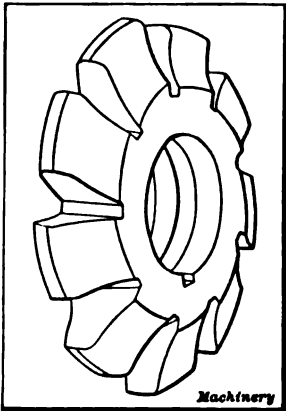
Cutter for Milling the Teeth of Spur Gears
